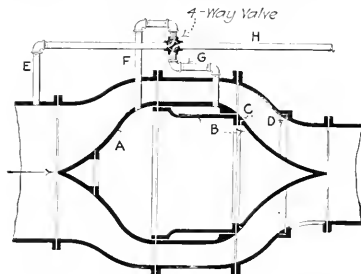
SECTIONAL VIEW OF THE PENSTOCK VALVE
